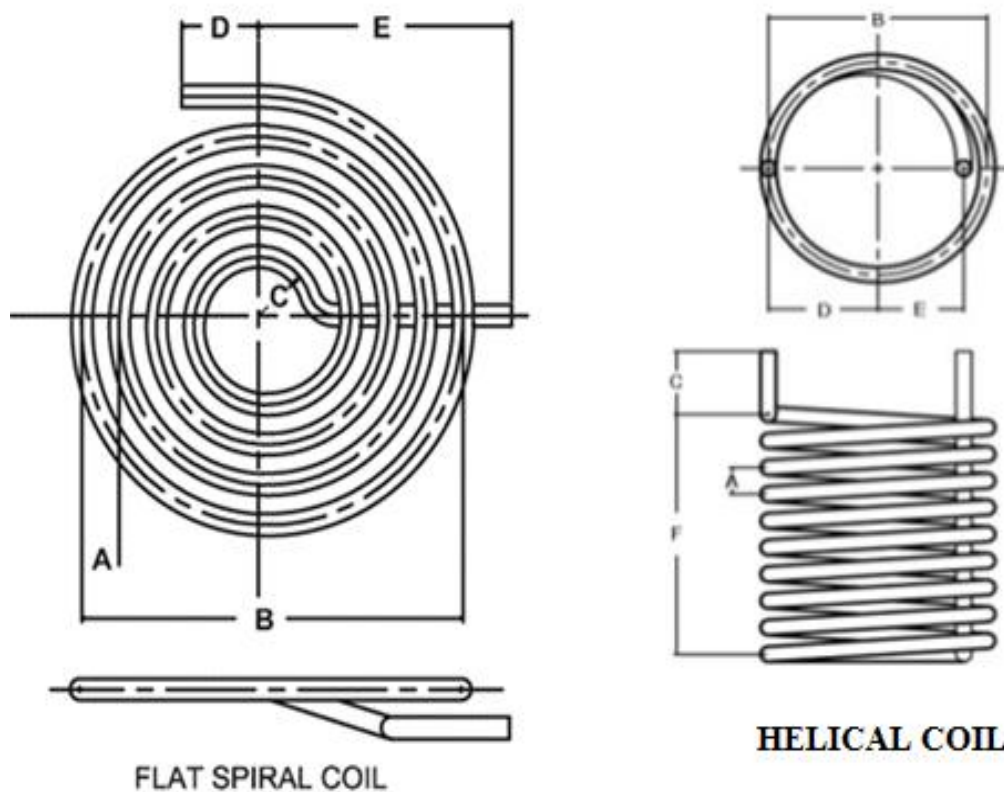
Spiral and helical coiled tubes for heat exchanger [13]
